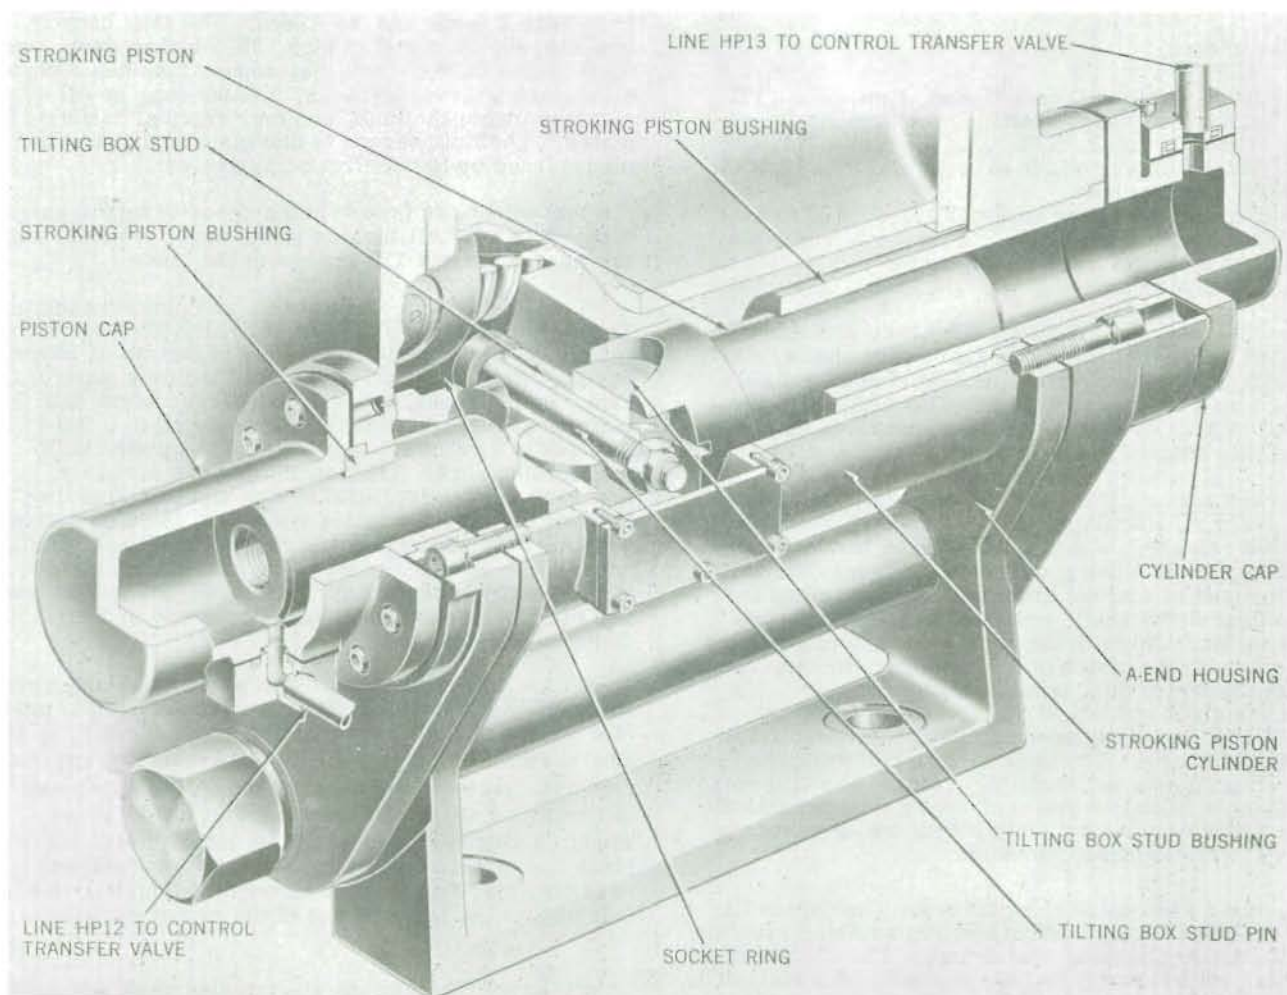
Training Gear A-end Stroking Piston, Cutaway View
